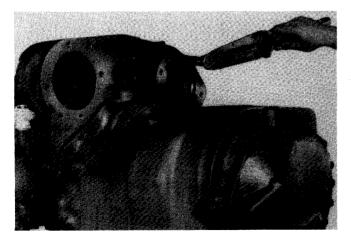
Install pump adaptor, bolts and washers. Tighten to specified torque. (See torque chart).
